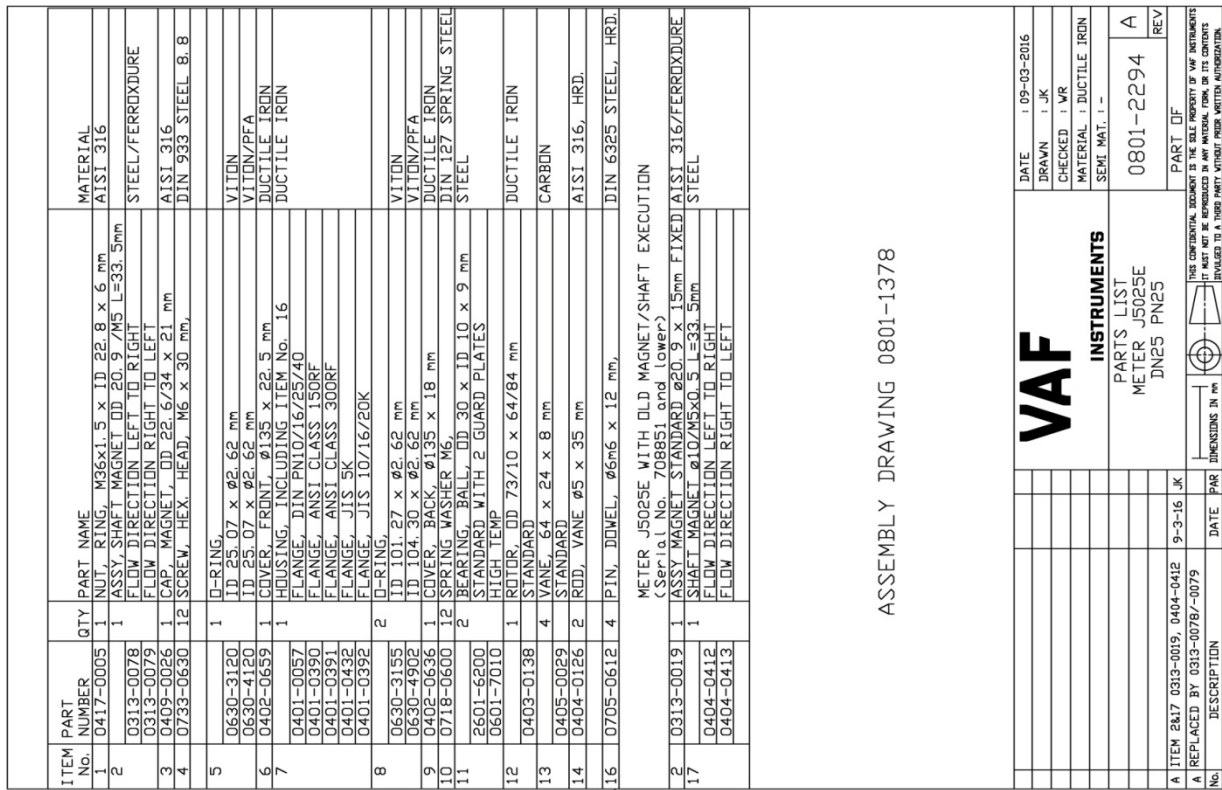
Drawing 0801-2294 – Partslist J5025E DN25 PN25
